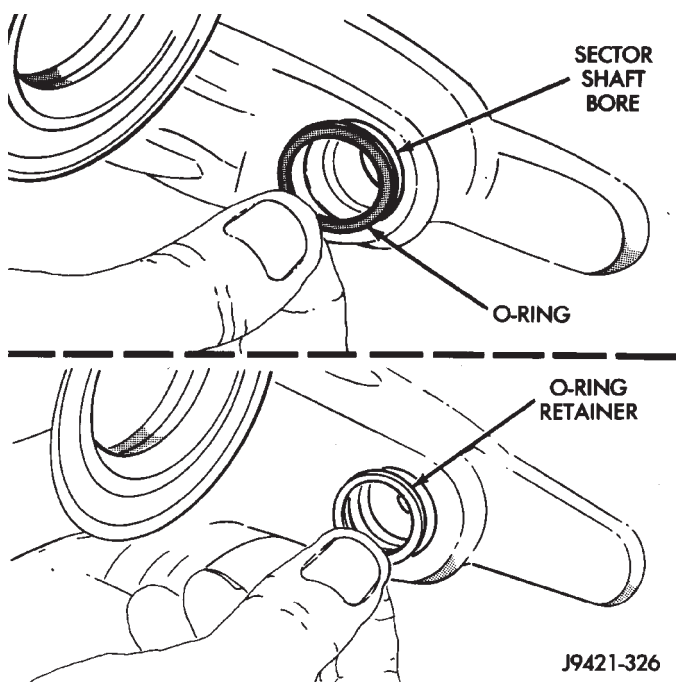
Sector Shaft O-Ring And Retainer Installation
